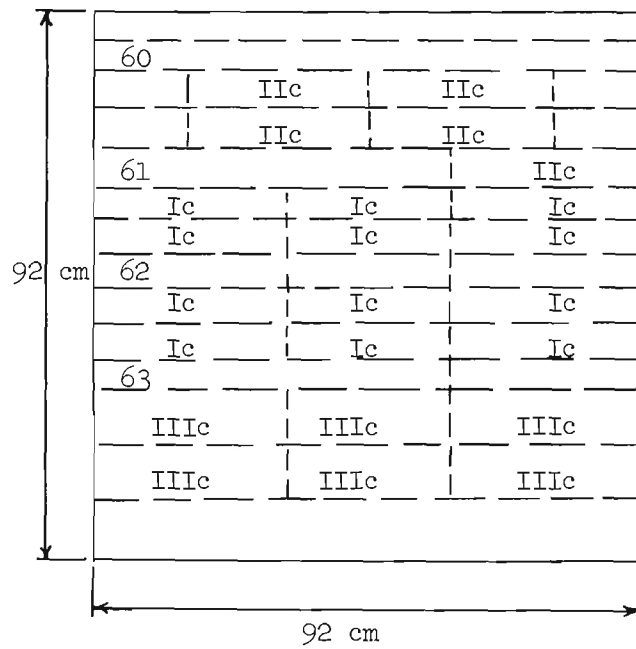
Layout of Component of the Test Specimens from 1.89 cm Steel Plate.
